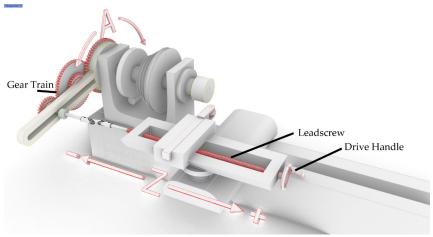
and the process of connecting two axes to move together An example using Figure 2 might look like this: we would turn the Drive Handle which turns the Leadscrew moving the cutting tool along the Z axis which is connected to, and turning, the Gear Train which is rotating the spindle around the A axis. This combined action results in a spiral cut in the workpiece.
